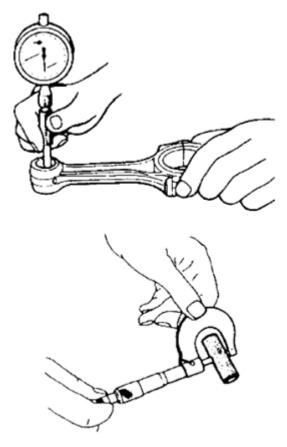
Measuring Piston Pin Diameter Courtesy of SUZUKI OF AMERICA CORP.
